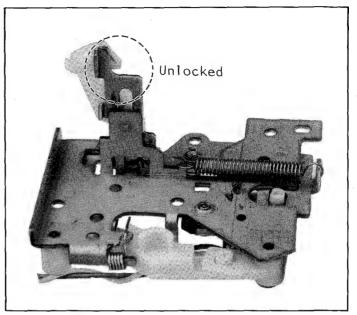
Adjustment of Cam Gear and Mode Select Switch - (7)
